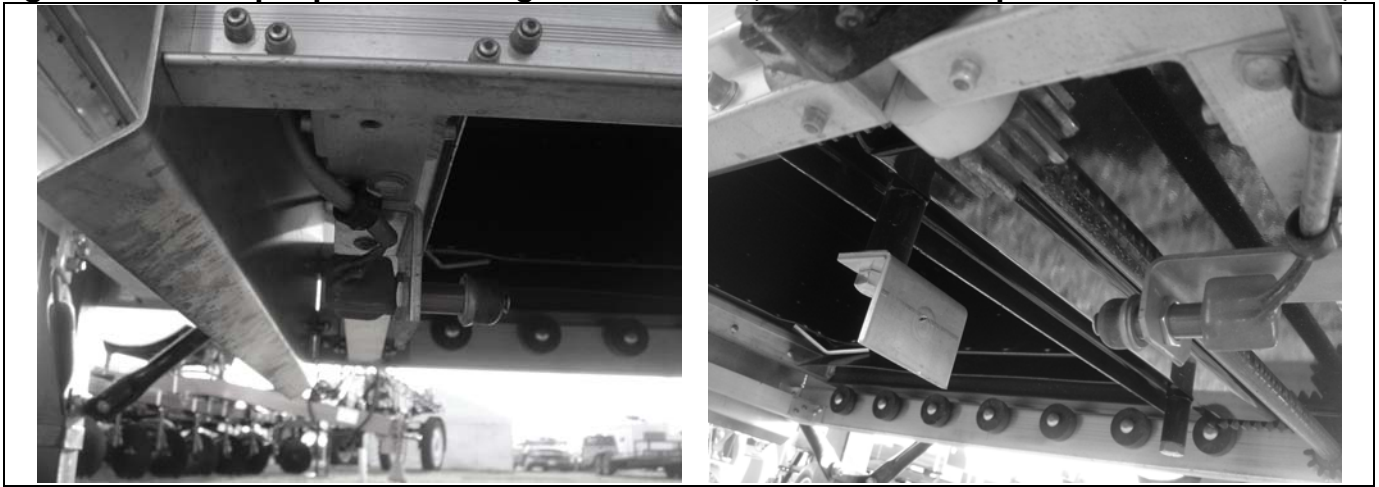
One bracket, switches mounted at opposite ends, door closed
